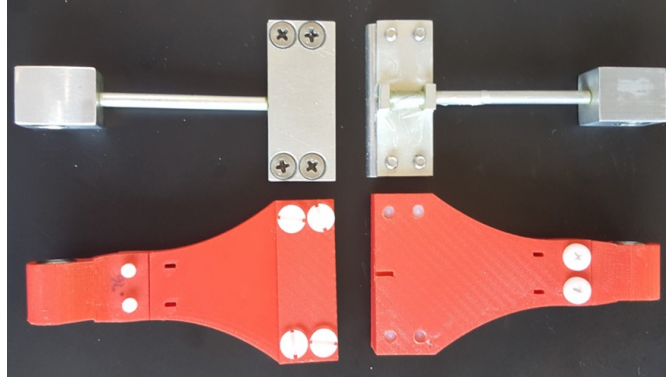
Aluminum fixture v2 and ABS plastic fixture v7, two fixtures utilized while validating the Column Bend Test method
